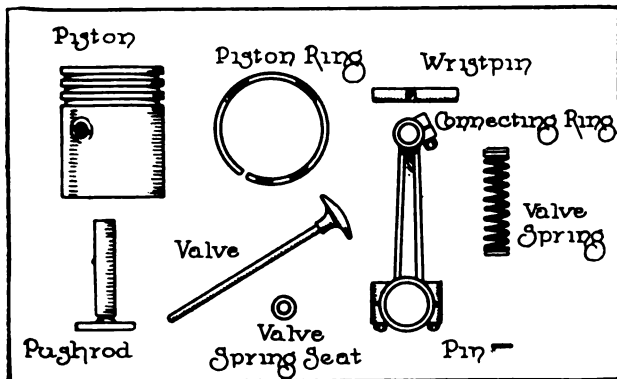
Showing Piston Components and Members of the Valve Assembly.
